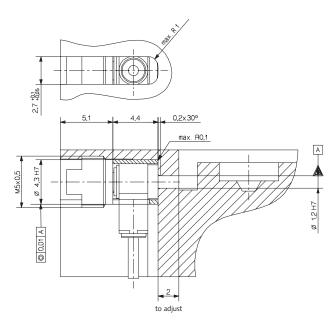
Mounting with spacer sleeve (Art. No. 3.050.262) and mounting nut (Art. No. 3.050.261)
